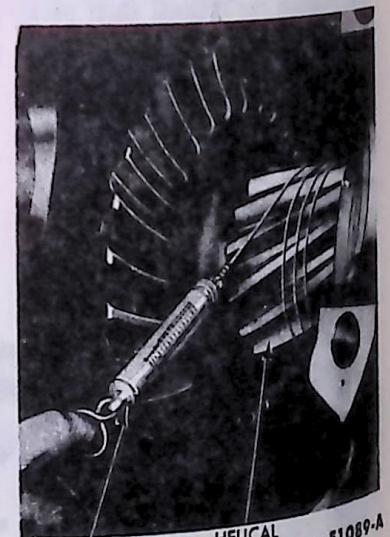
Checking Cross Shaft Bearing Pre-Load
